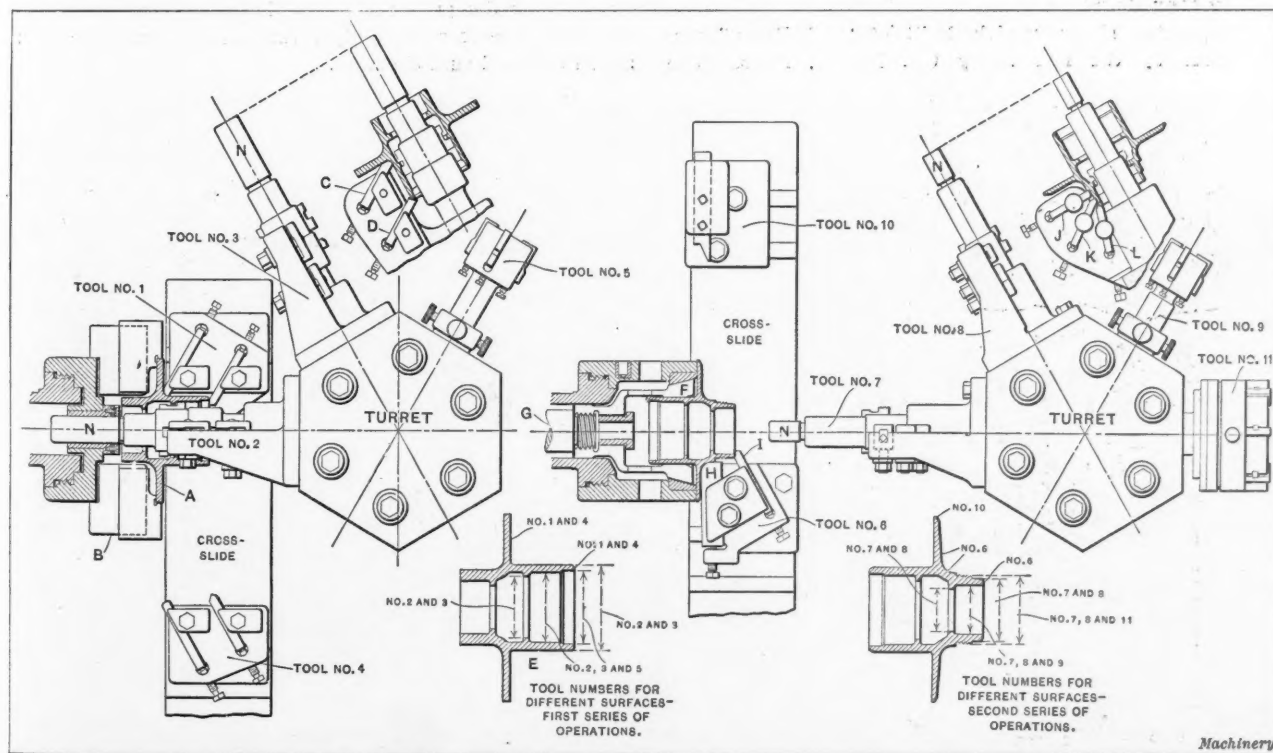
Diagram showing Layout of Tools for performing First Series of Operations on Automobile Wheel Hubs
